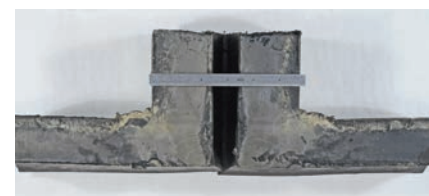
This cutaway shows the fracture surface of the tee branch to tee main run
